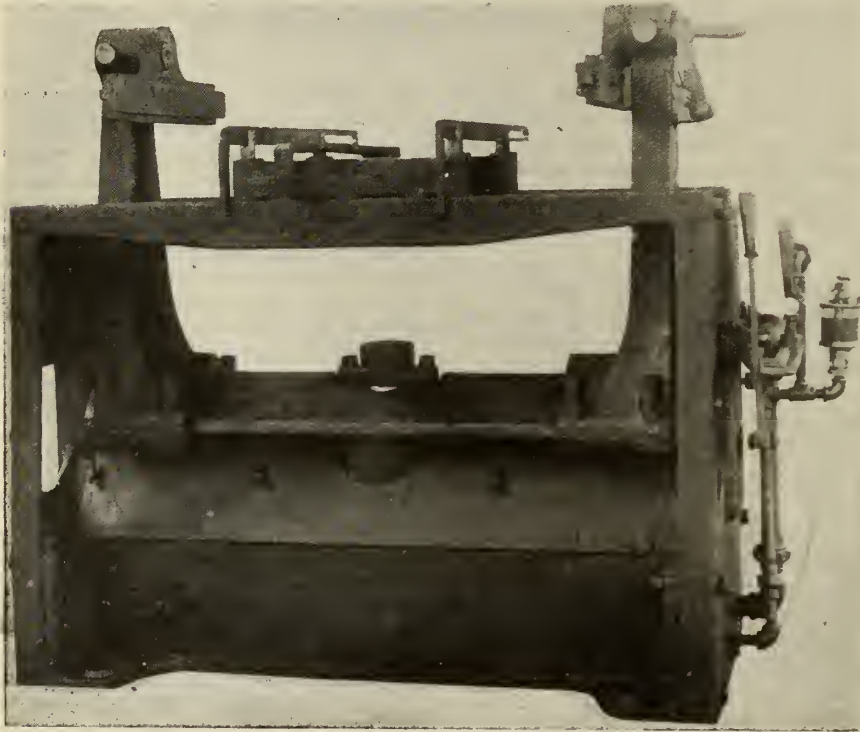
DIRECT DRAW ROLL-OVER JOLT MOLDING MACHINE.
